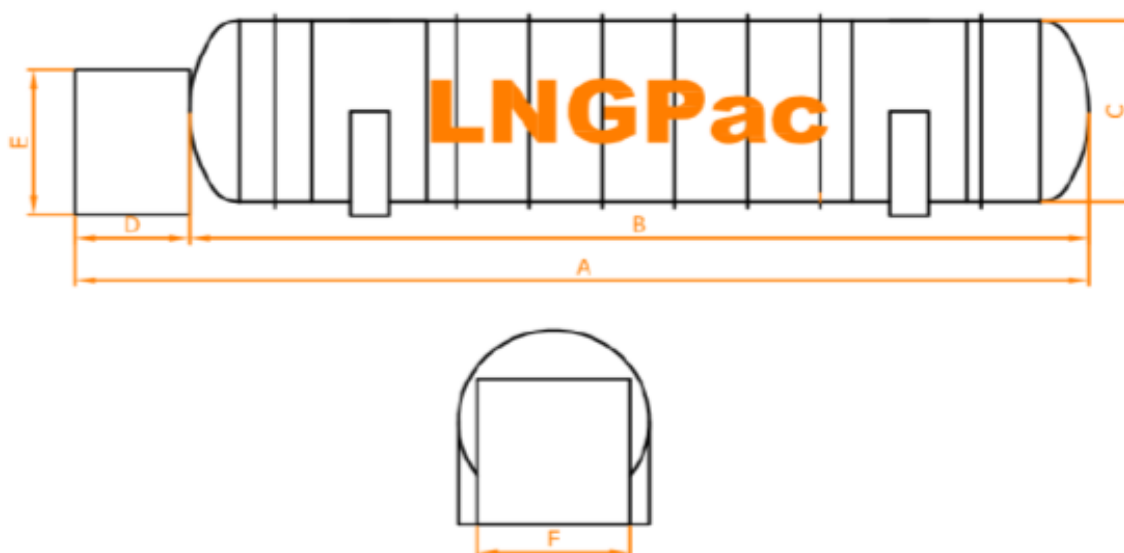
Scheme and dimensions of the LNGPac. Source: Wärtsilä
